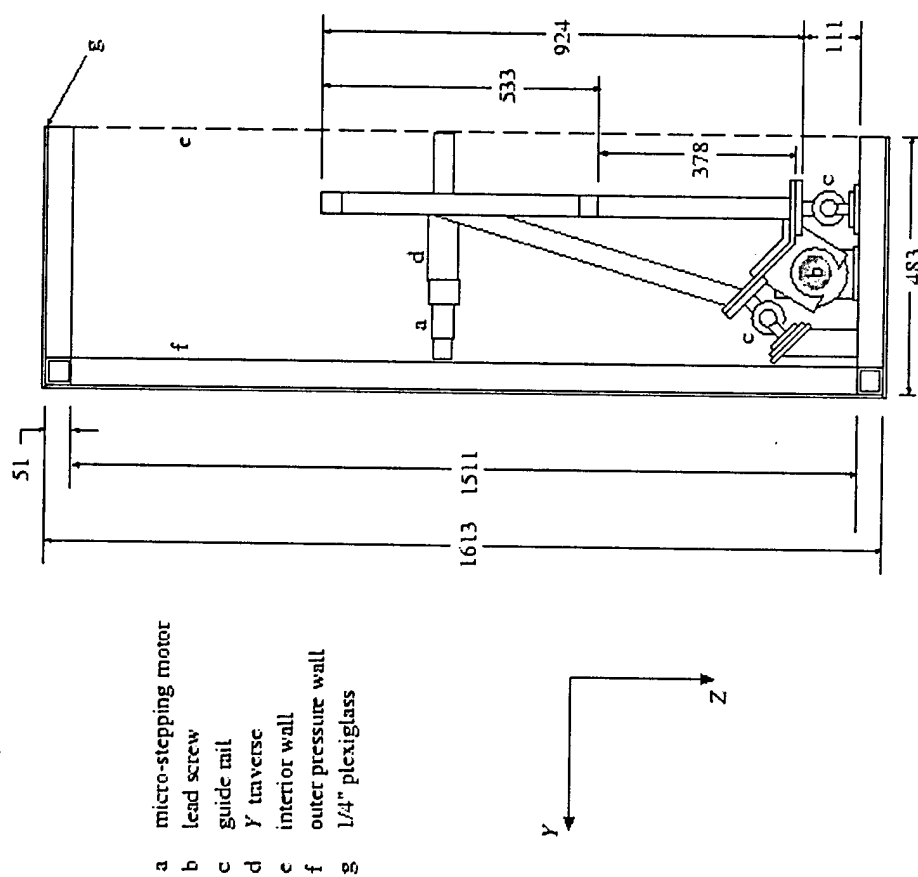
Side view of the traverse structure. All dimensions in millimeters.
